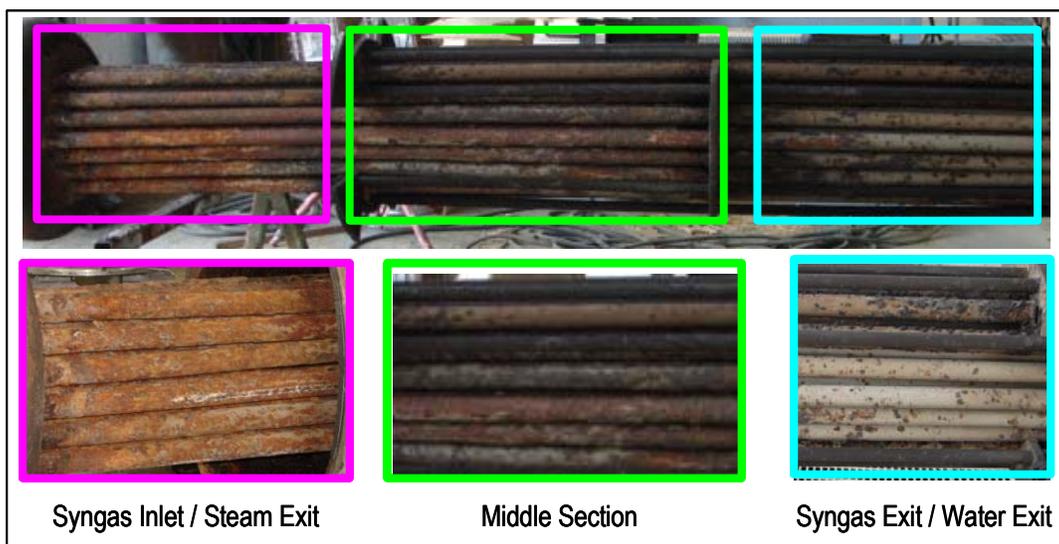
Inspection of Primary Gas Cooler Tube Bundle.
